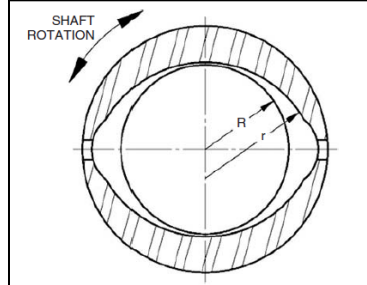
26 Elliptical or lemon bore journal bearing [18]
